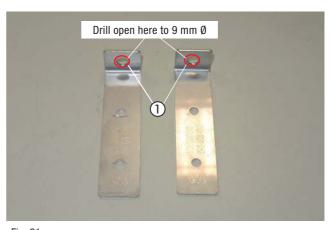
① 2x existing holes drilled open to 9 mm  $\emptyset$
